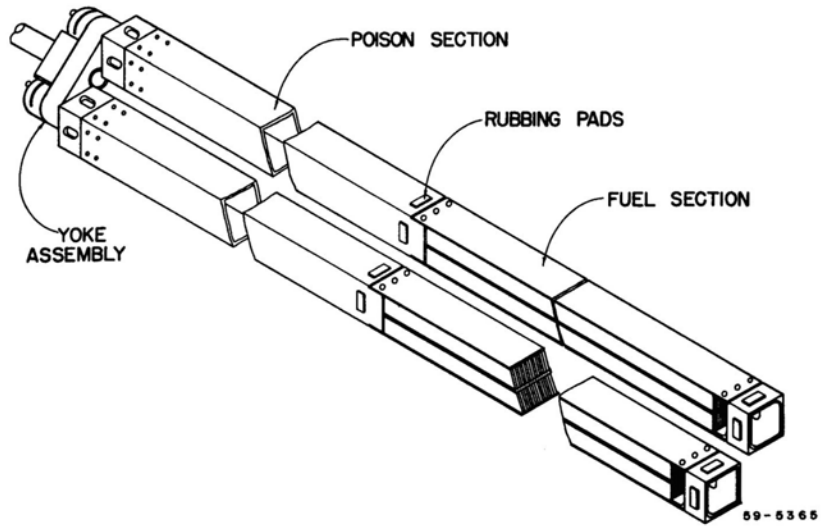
Spert C-Core Control-Fuel Assembly (Ref. A-37)
